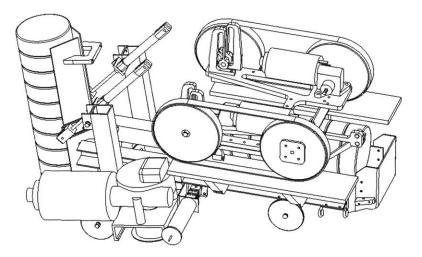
View of CAD model of Sample Machine in Starting Configuration.
